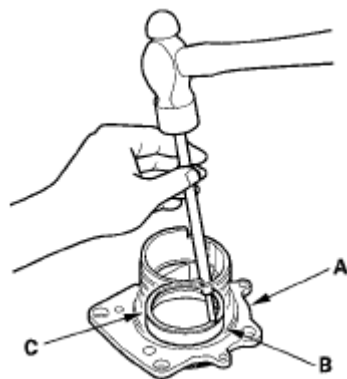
Removing Tapered Roller Bearing Outer Race, Thrust Shim And Transfer Holder
